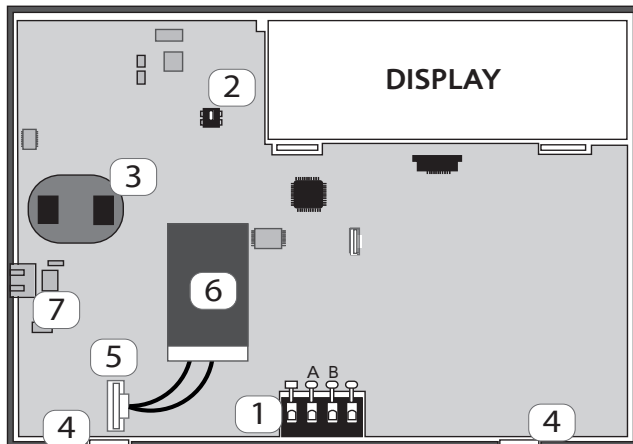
PARTS DESCRIPTION AND PCBA TERMINALS
